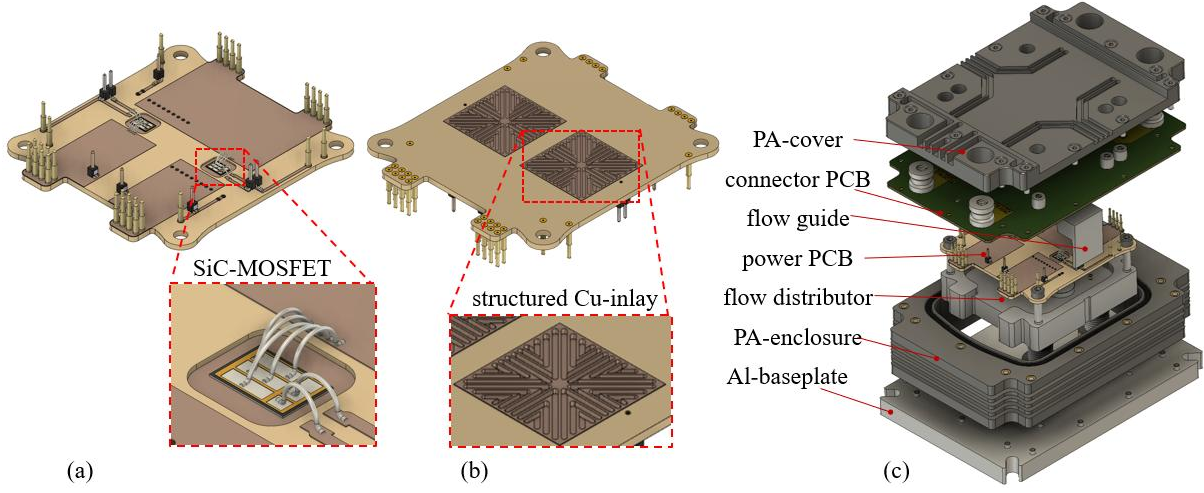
(a) power PCB top view, (b) power PCB bottom view, (c) exploded view
